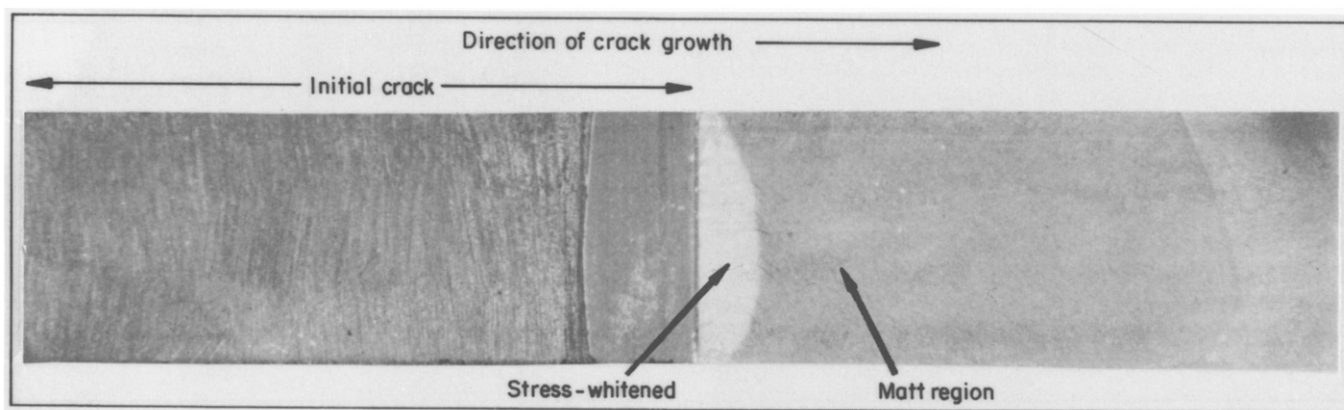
The fracture surface from a CT specimen (containing a through-thickness crack)
